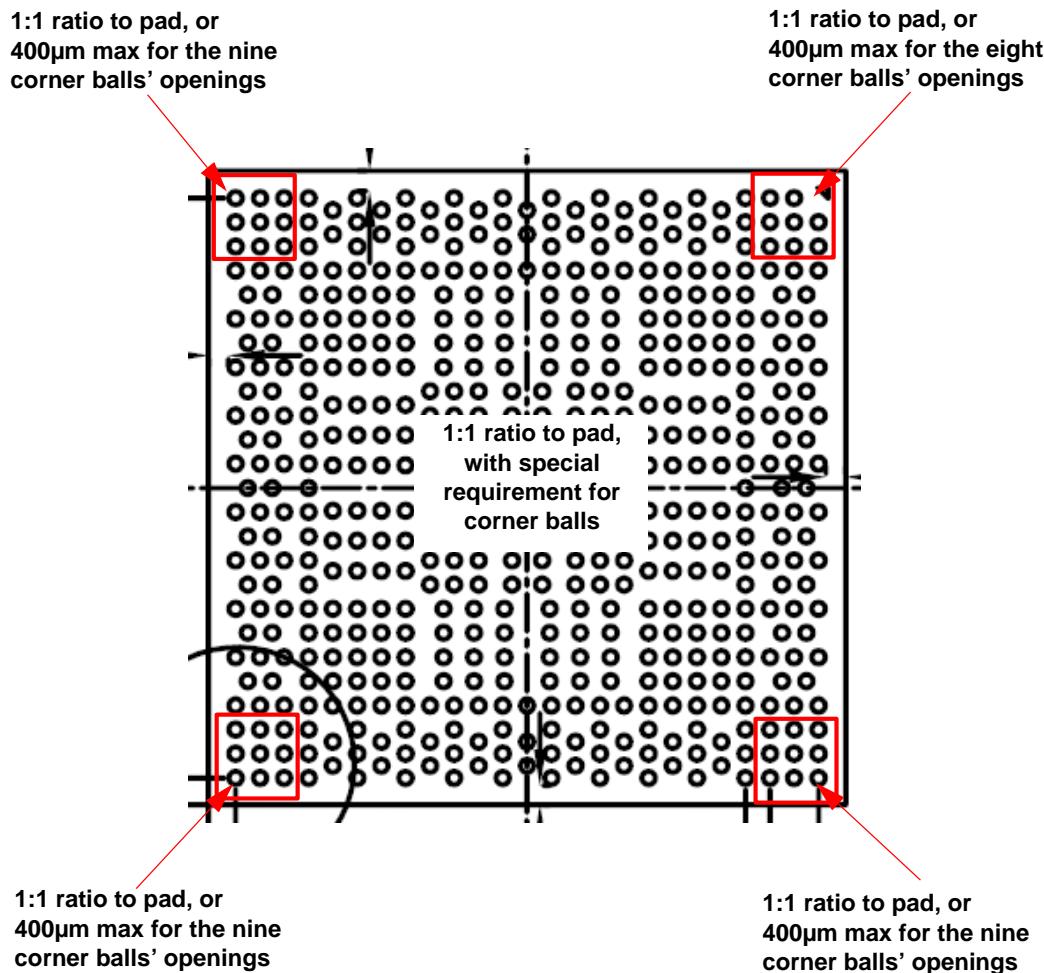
Recommended Stencil Opening Sizes for Solder Paste Pads on PCB
